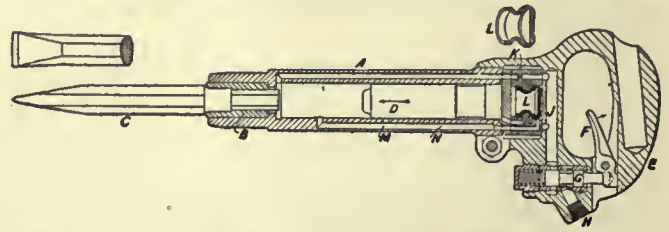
Tierney Pneumatic Chipping Hammer. (The Globe Pneumatic Engineering Co., Ltd.)
